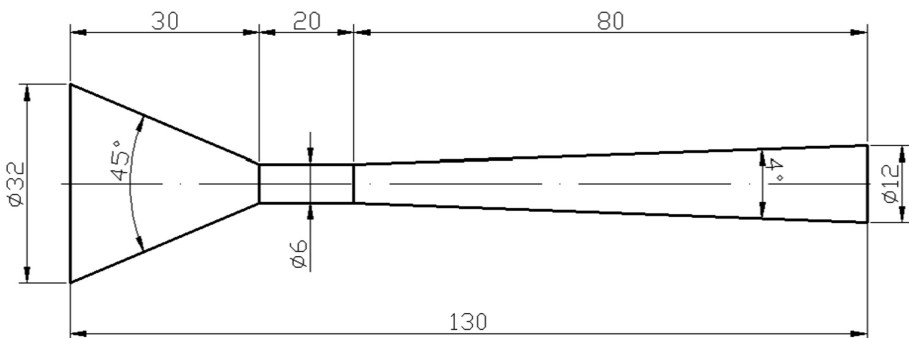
Geometric dimensions of the inner surface of Venturi nozzle UDC32-450.
